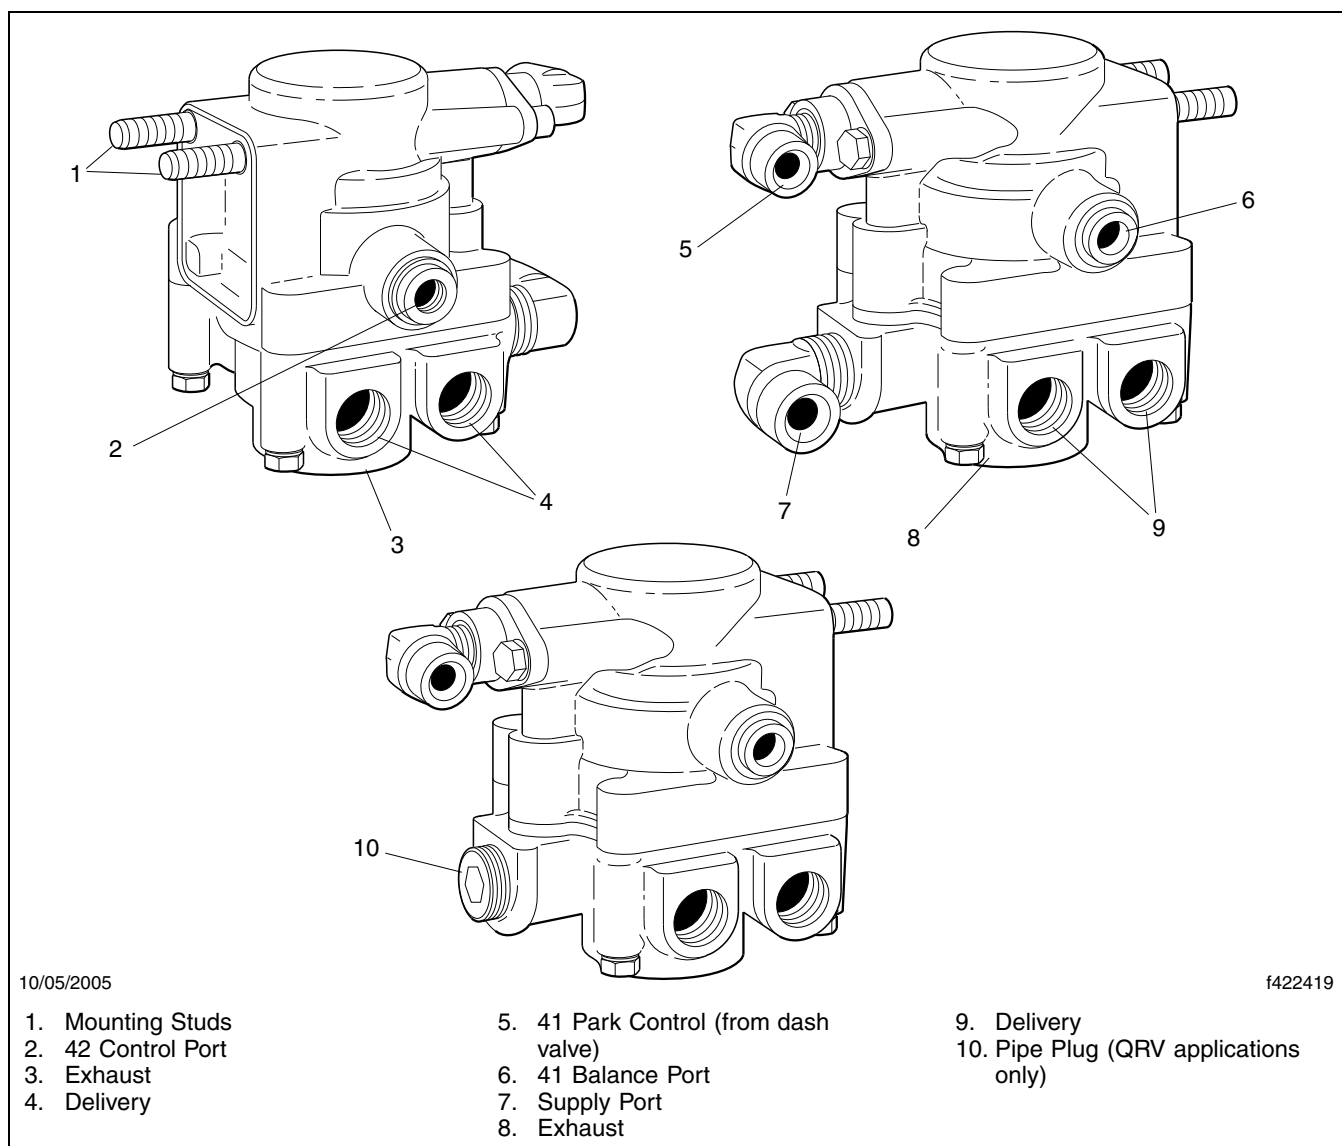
, SR-7 Spring Brake Modulating Valve (exterior views)
